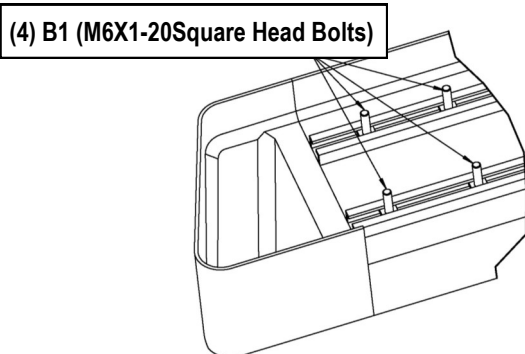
Typical Passenger Front Mounting Bracket Installation
